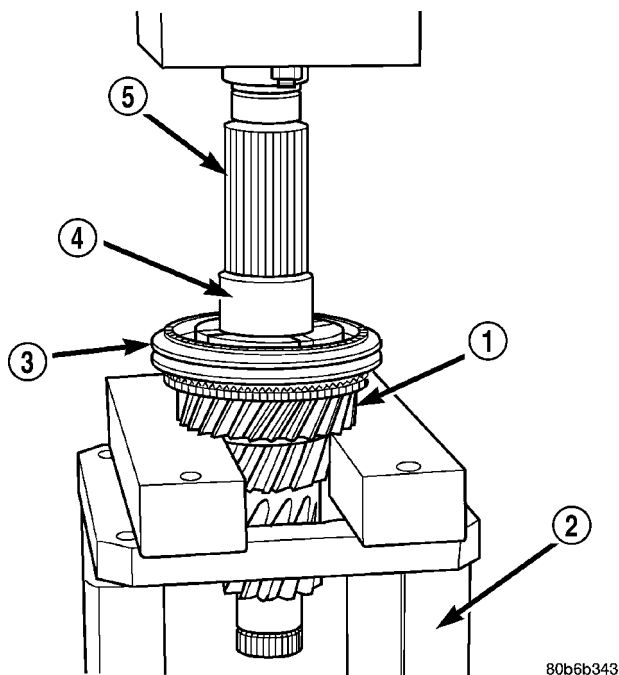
FOURTH COUNTERSHAFT GEAR COMPONENTS
